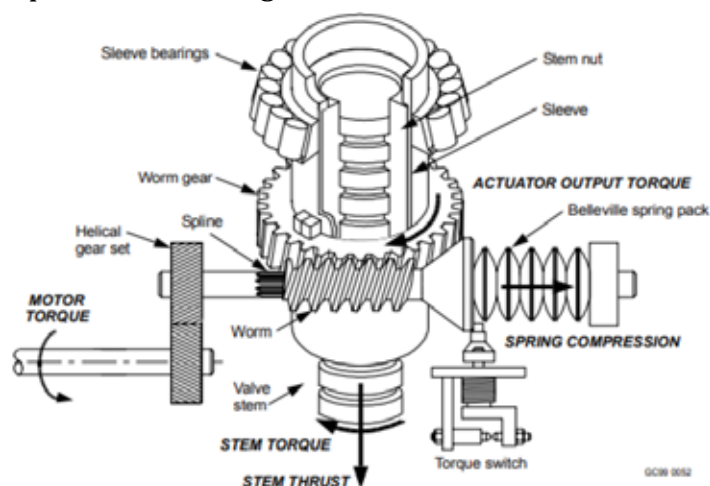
Breakaway drawing of a Motor Operated Valve (MOV) actuator with main parts labelled
